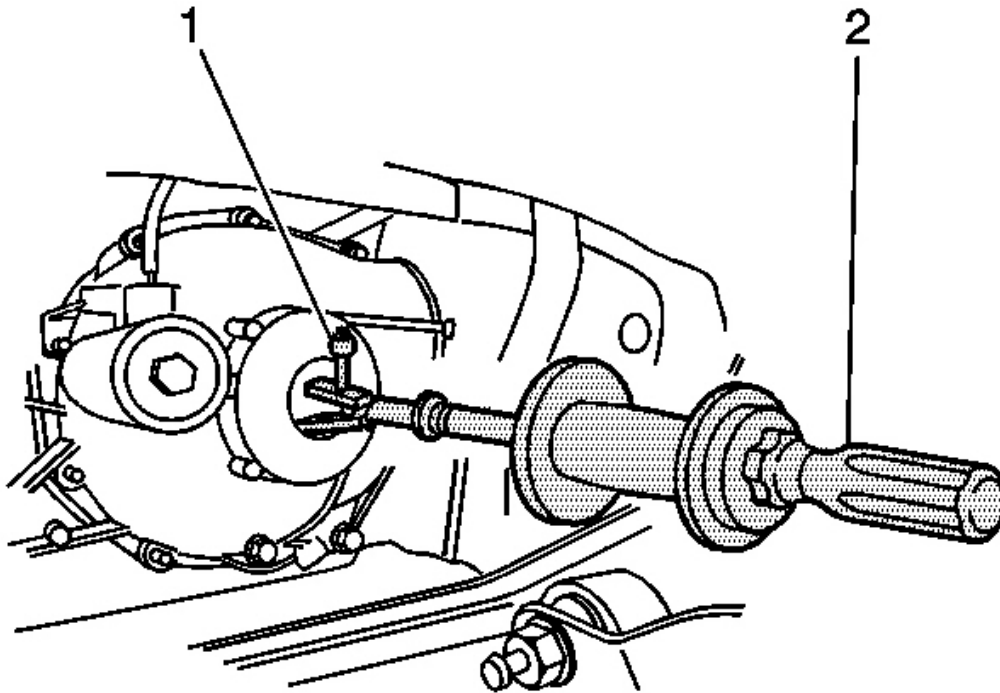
Identifying Special Tools J 6125-B & J 29369-2
